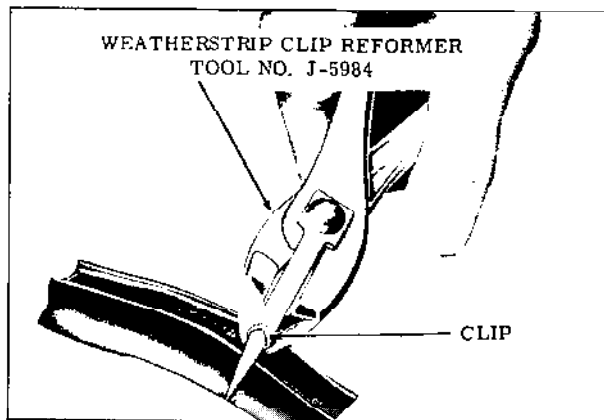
Reforming Weatherstrip Clips with Tool J-5984
